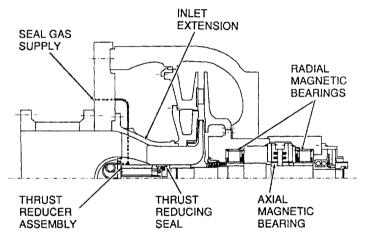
Axial inlet thrust reducer. (Revolve Technologies, Calgary, Alberta, Canada)
